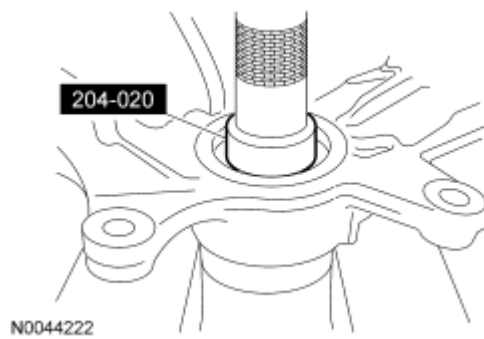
Pressing Outer Wheel Bearing Race From Wheel Knuckle Using Special Tool (204-020)
